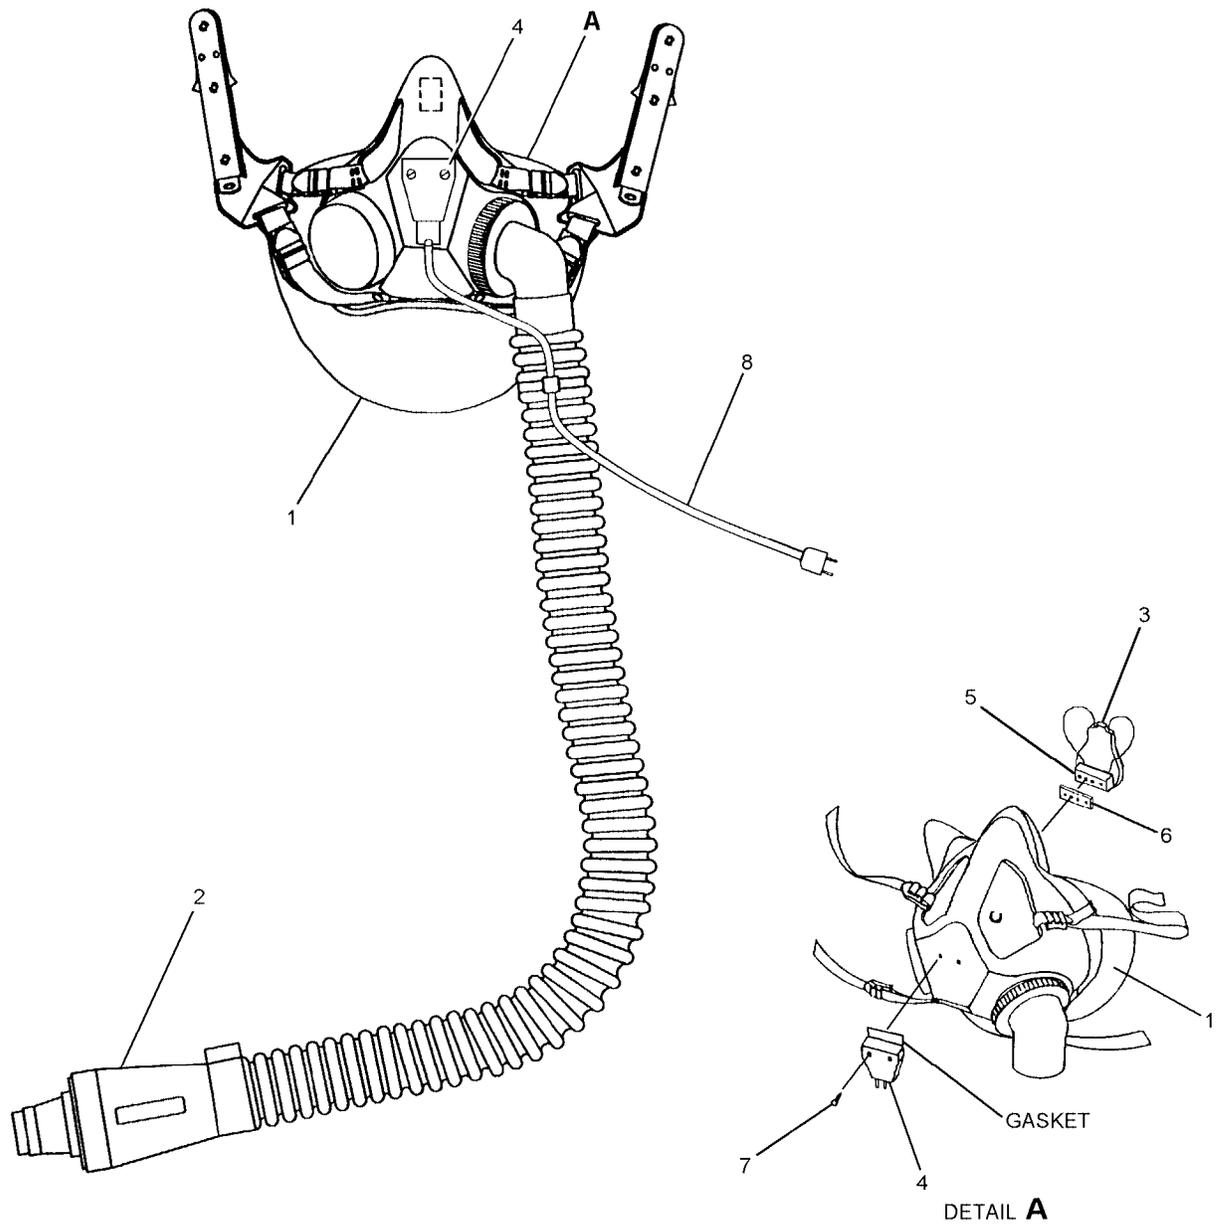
MBU-23(V)7/P Oxygen Mask Assembly Components
